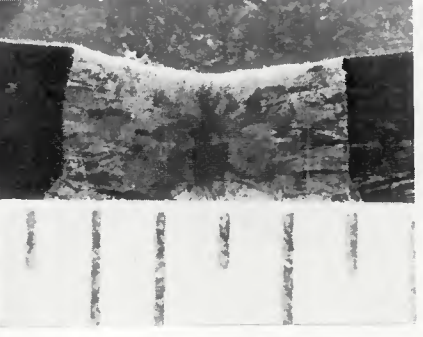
Weld UG 14(100)-18, 5G position, 0.79 mm (1/32 in.) root opening, zero mismatch. 1 mm scale (reduced 53% on reproduction)
